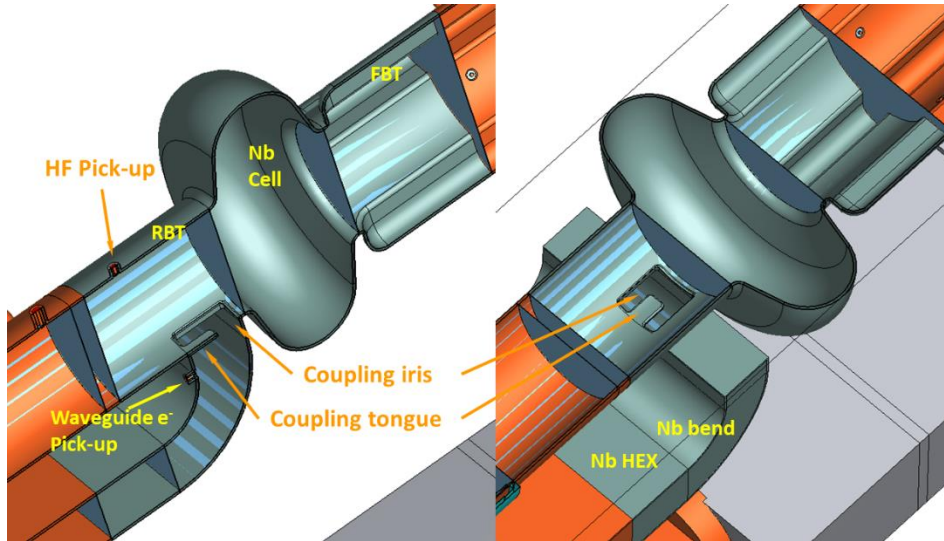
Cutaway view of the CESR cavity showing cold Nb parts inside the liquid He vessel.
